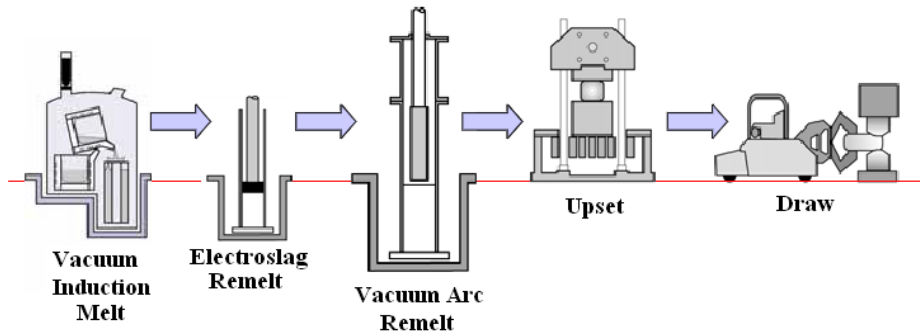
Typical Thermo-Mechanical-Process used for the production of Ni-Fe billets [33].
